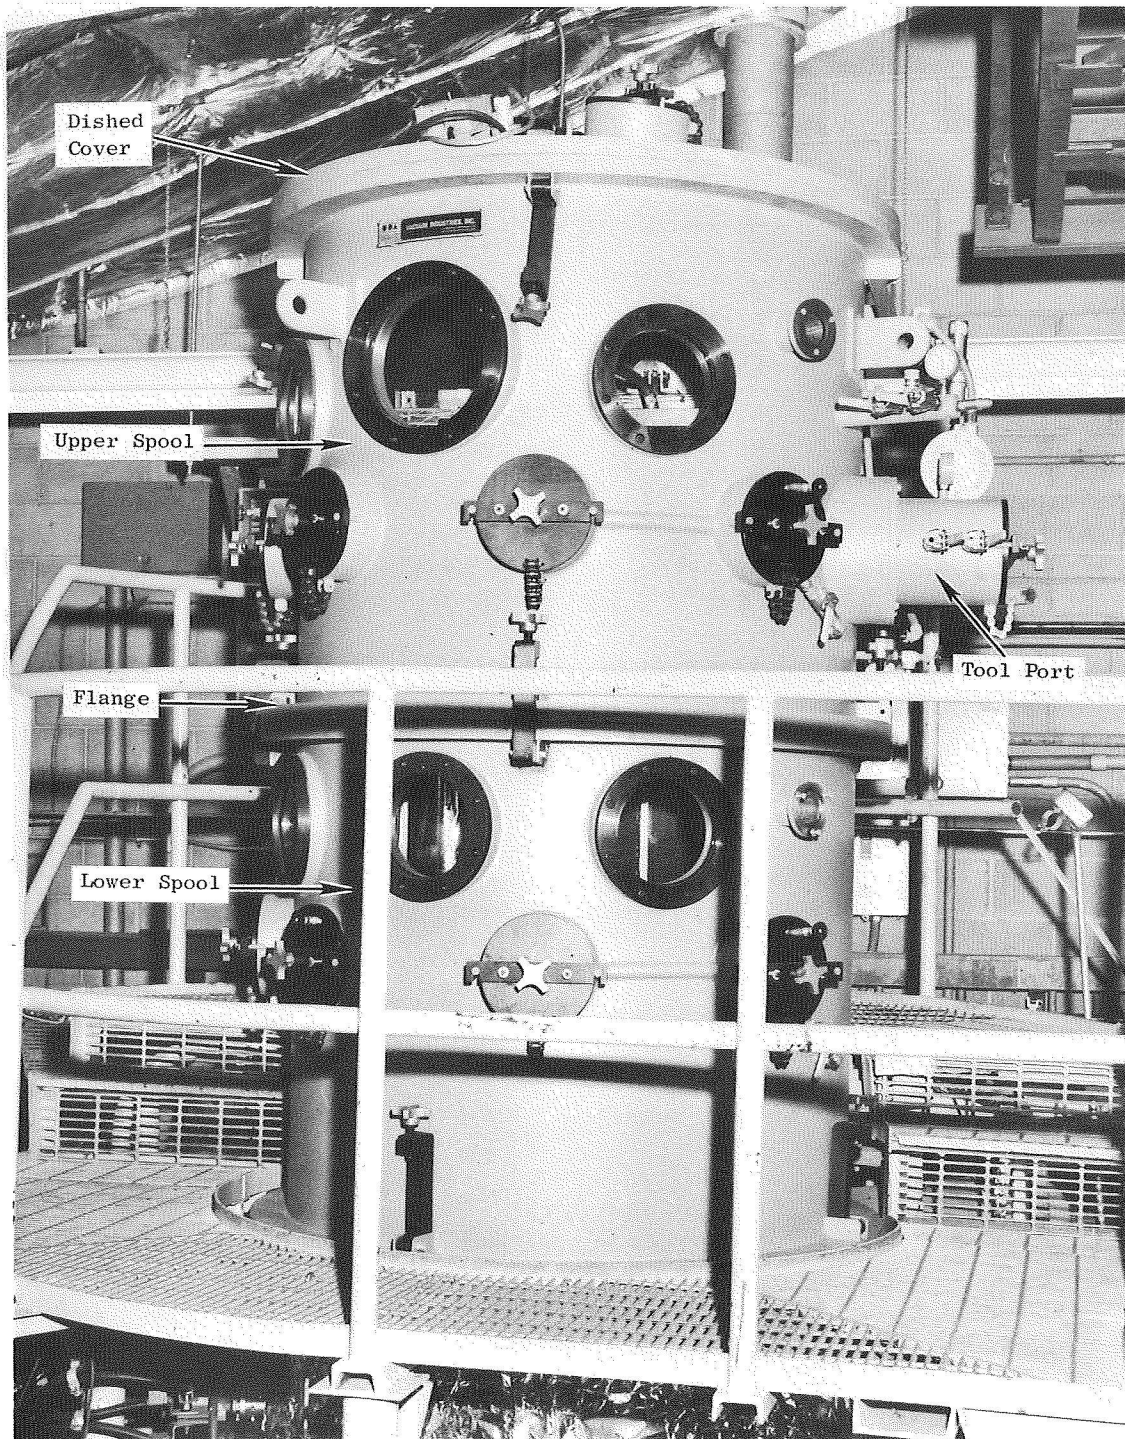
Welding Chamber Installed Around the T-111 Corrosion Loop. The Chamber Consists of Two Spools Which Can Be Rotated Independently for Improved Access to Weld Locations. (C68090424)
